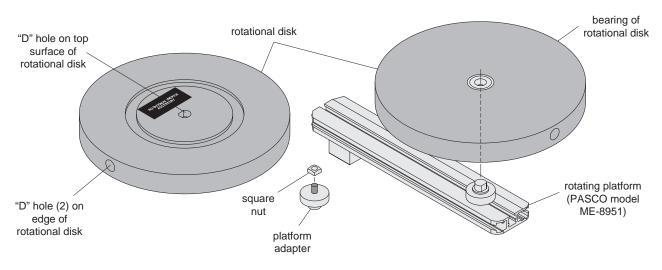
Rotational Inertia Accessory Including Platform Adapter Assembly
